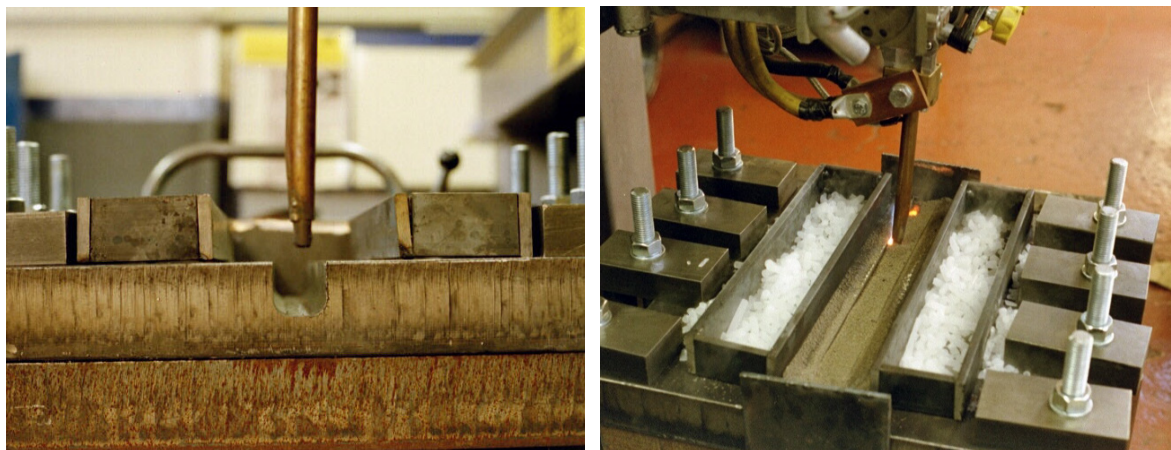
(a) Groove preparation for multi-run HICC test (b) Welding for HICC test in progress
